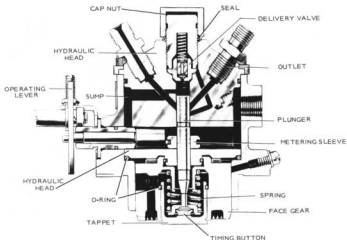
PSU PUMP (CUTAWAY VIEW)
